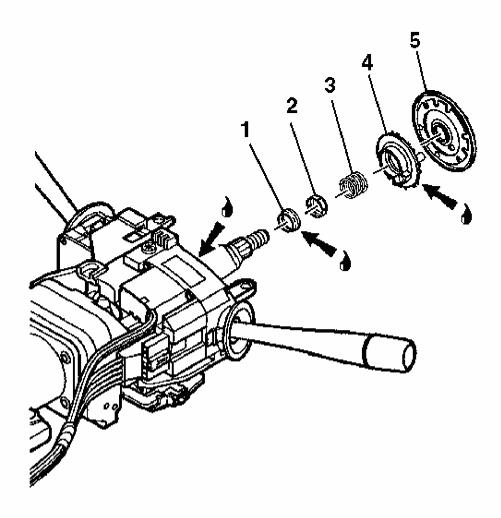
Installing Turn Signal Cancel Cam & Inner Race Courtesy of GENERAL MOTORS CORP.
